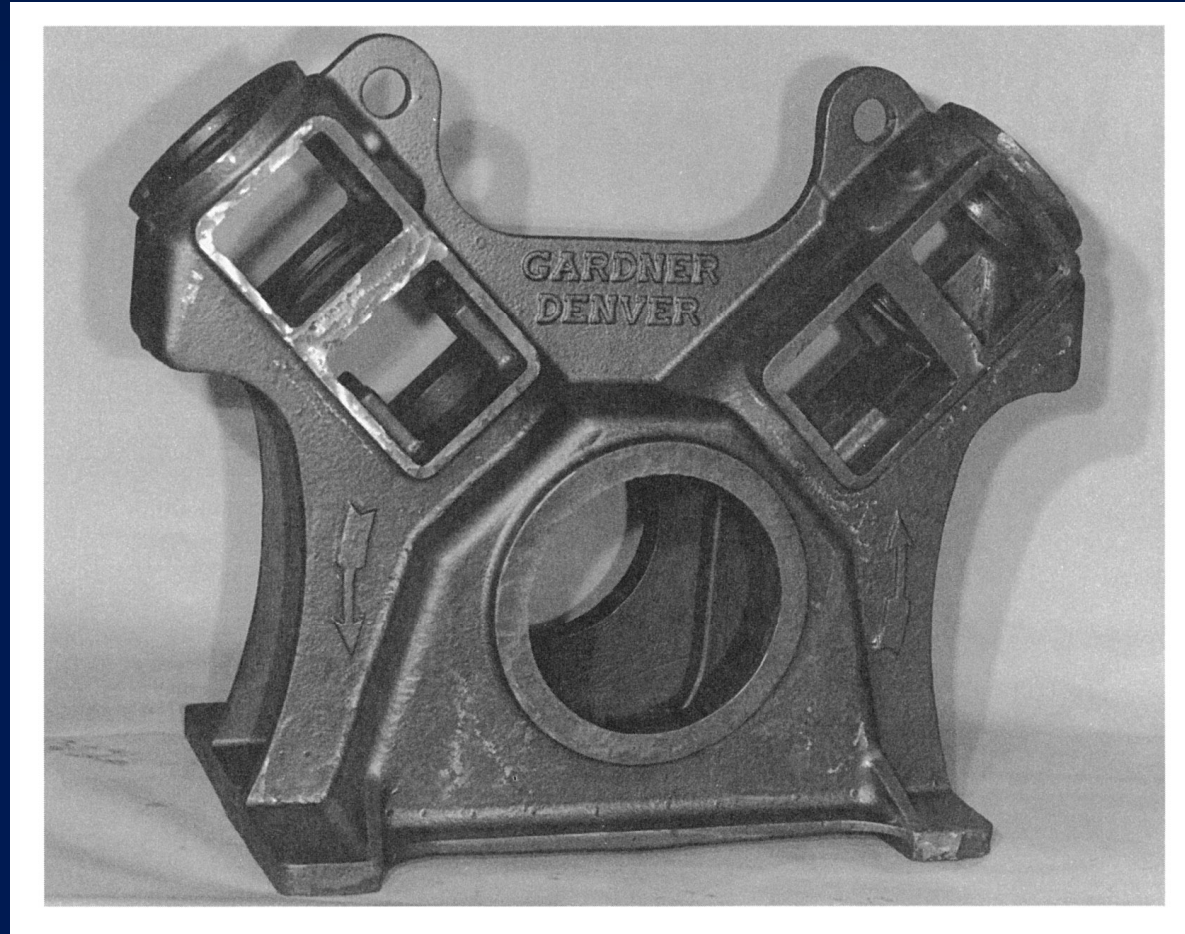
A large sand casting weighing over 680 kg (1500 lb) \ for an air compressor frame
